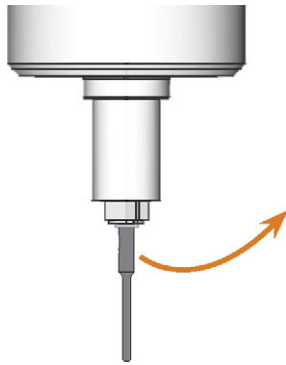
REMOVING THE TOOL FROM THE COLLET CHUCK
